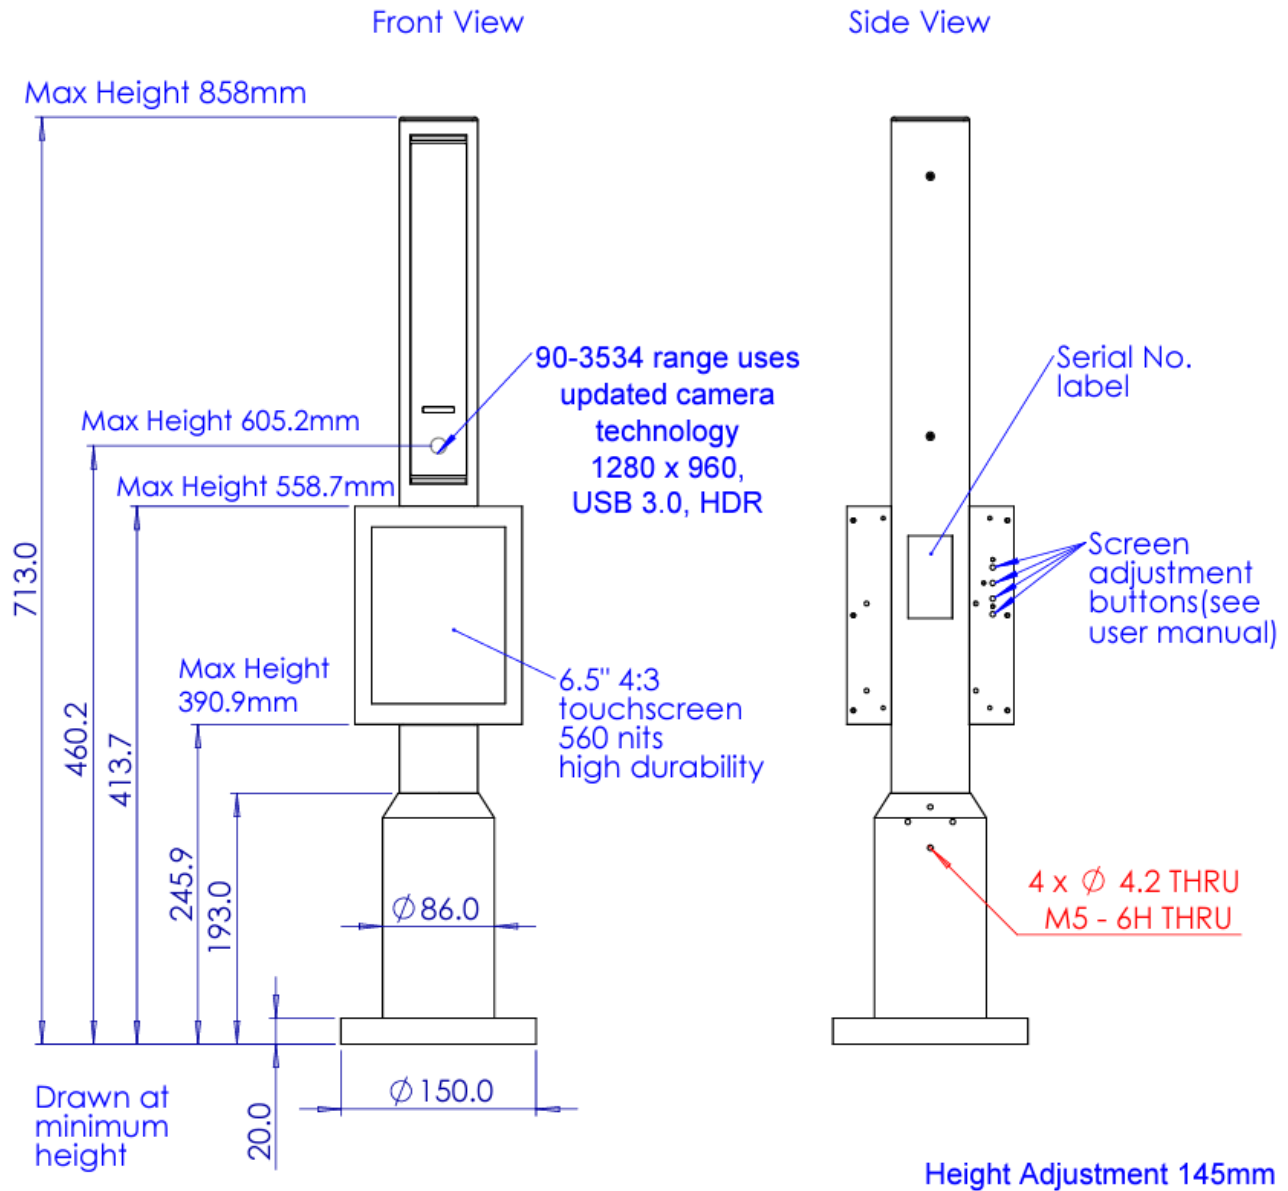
Dimensional drawing of the ASLOC Single USB3 710 Portrait with base.
